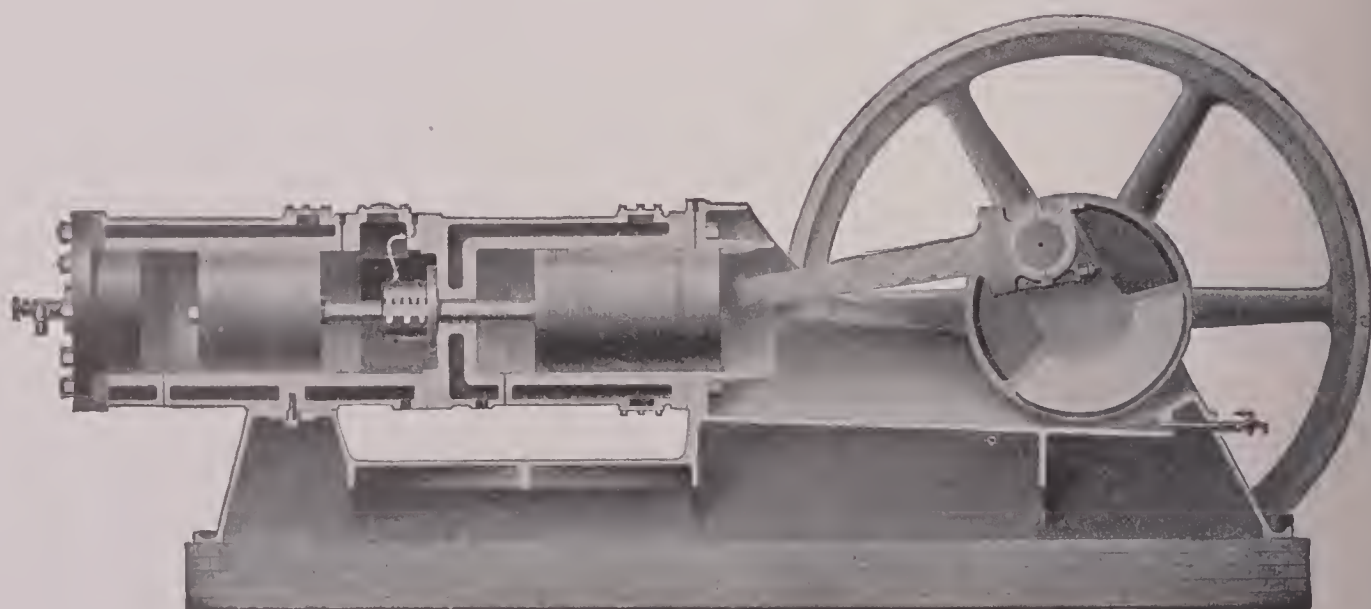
Cylinder Construction, Alberger Single-acting Tandem Engine.
